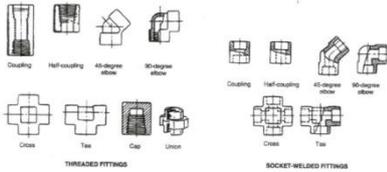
Forged Steel Threaded and Socket-Welded Fittings
